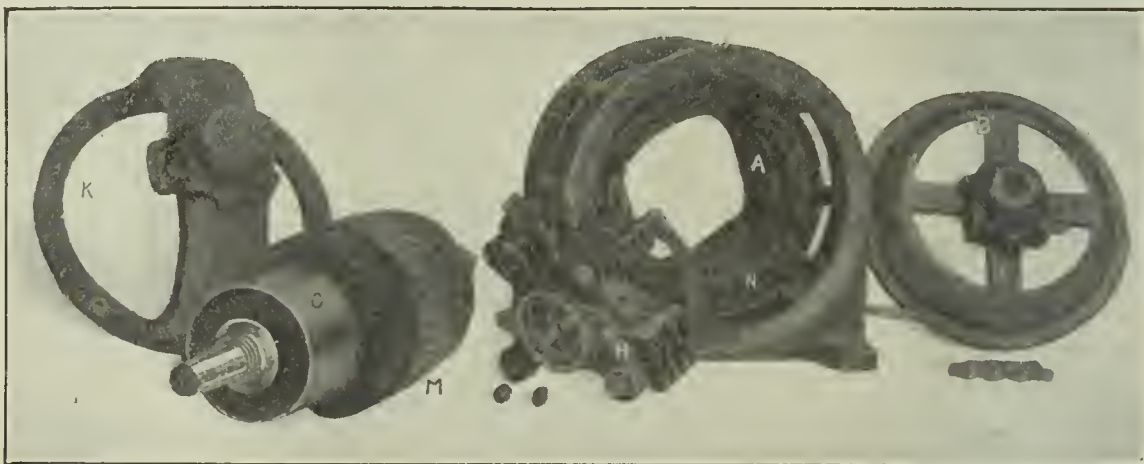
DISASSEMBLED VIEW OF THE MOTOR SHOWN IN FIG. 363.
